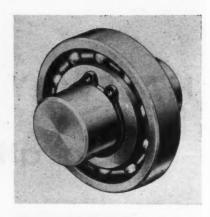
"Truarc" External Type Retaining Ring Used as Ball-bearing Shoulder on Shaft
